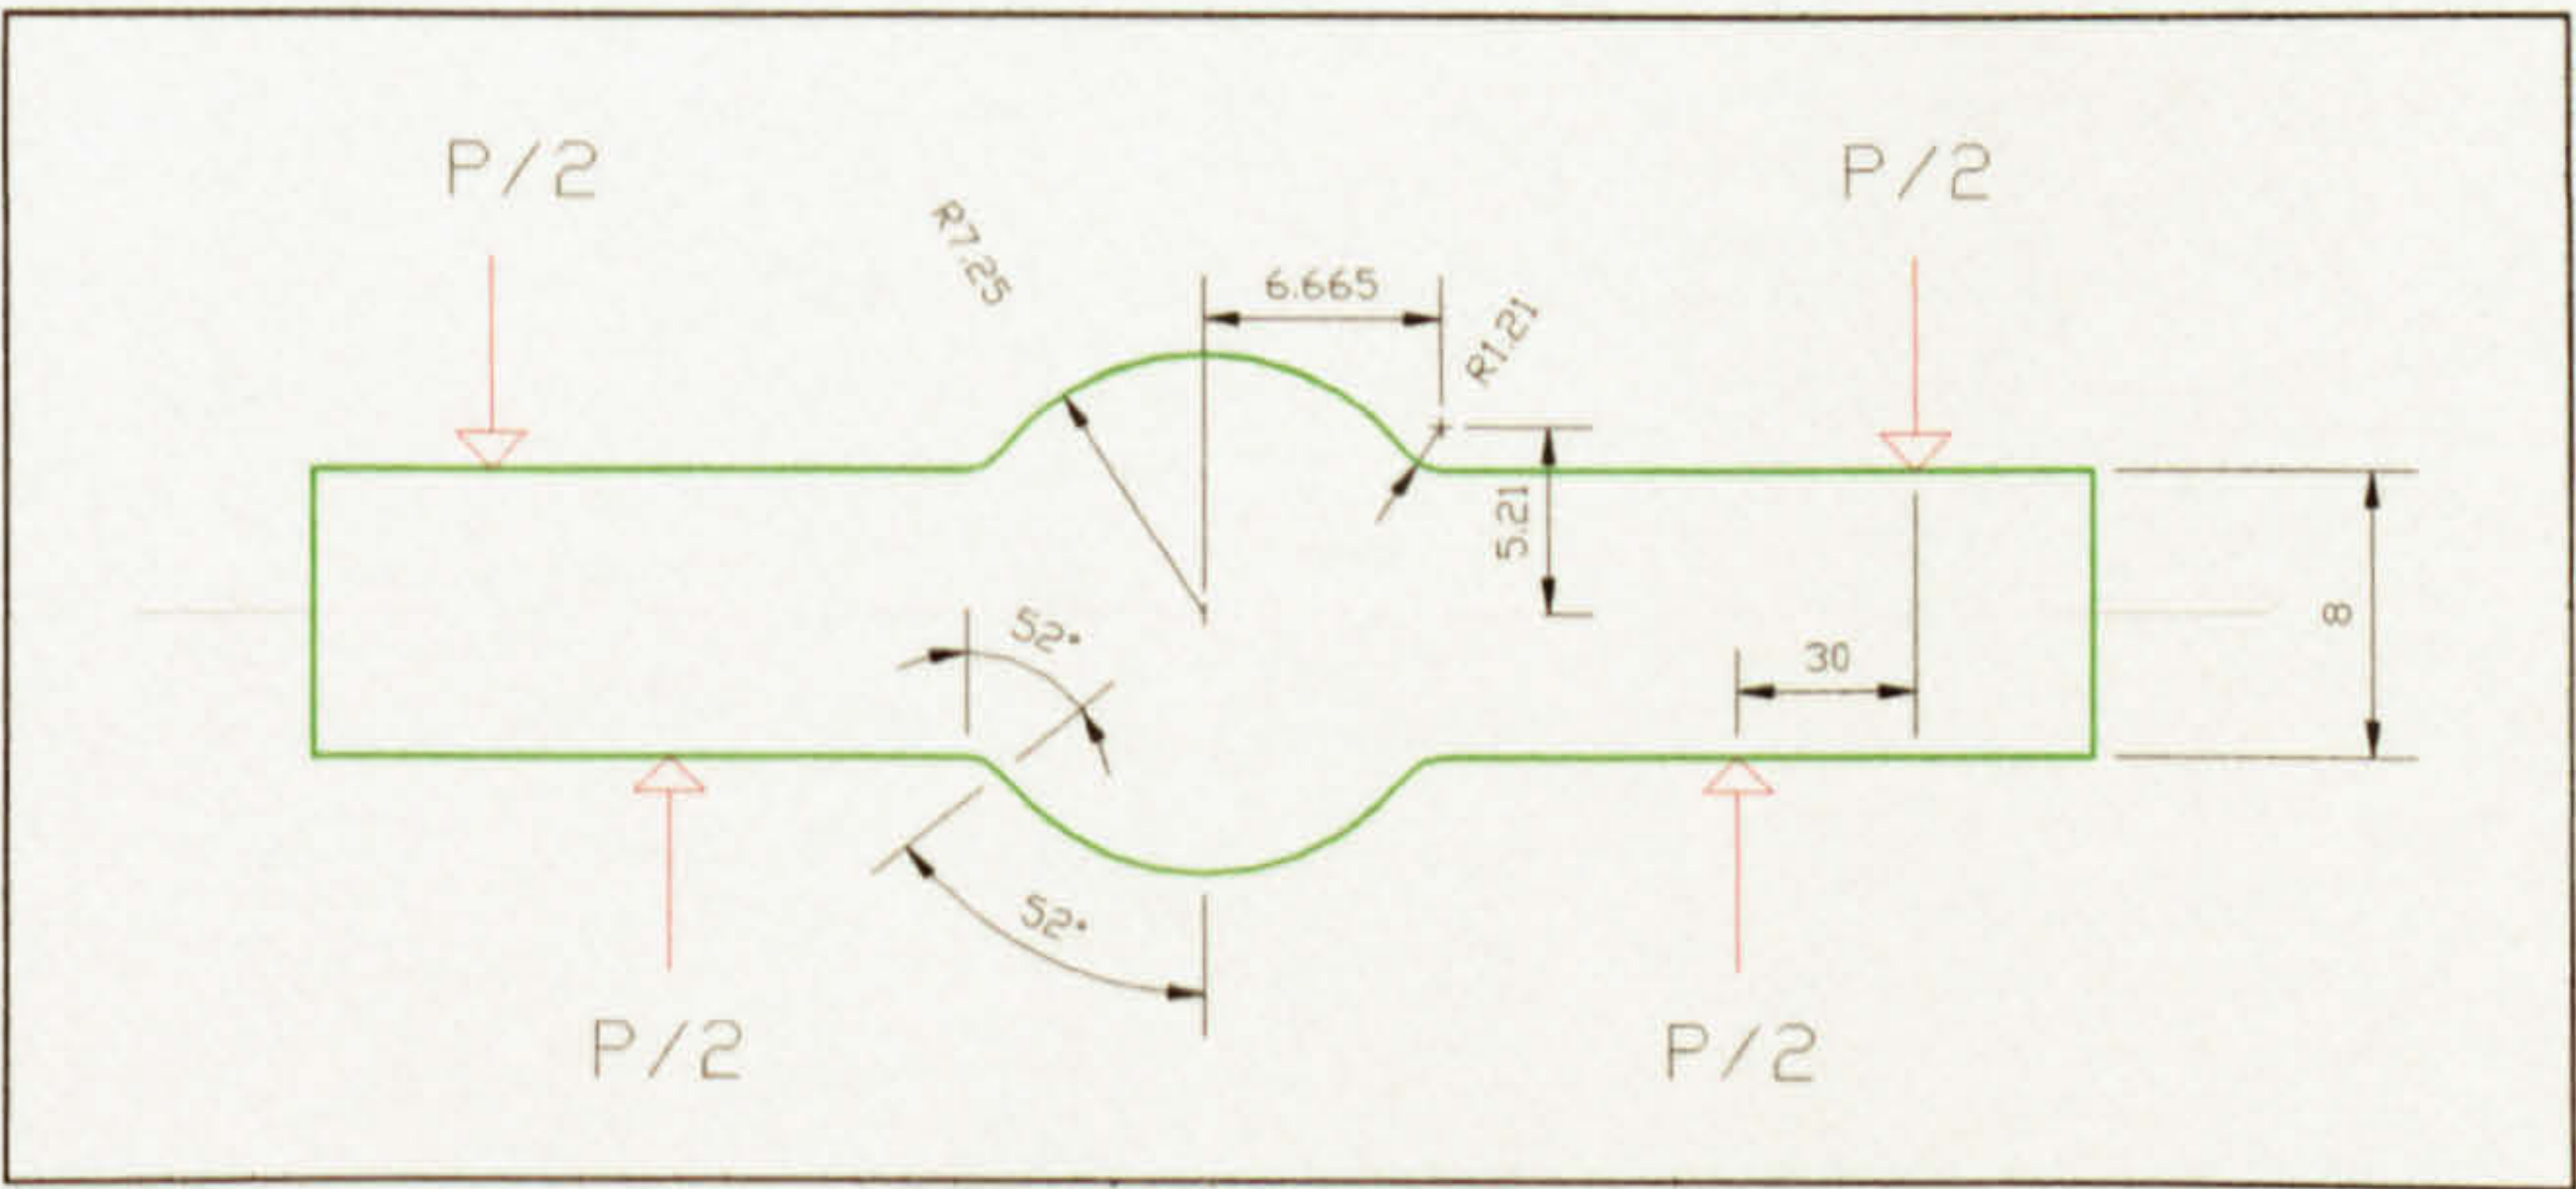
MIG HI (best case scenario, $r = 1.21$ mm) weld geometry utilising constant weld bead geometry and tangentially intersecting weld toe radius, $\theta' = 52^\circ$.
